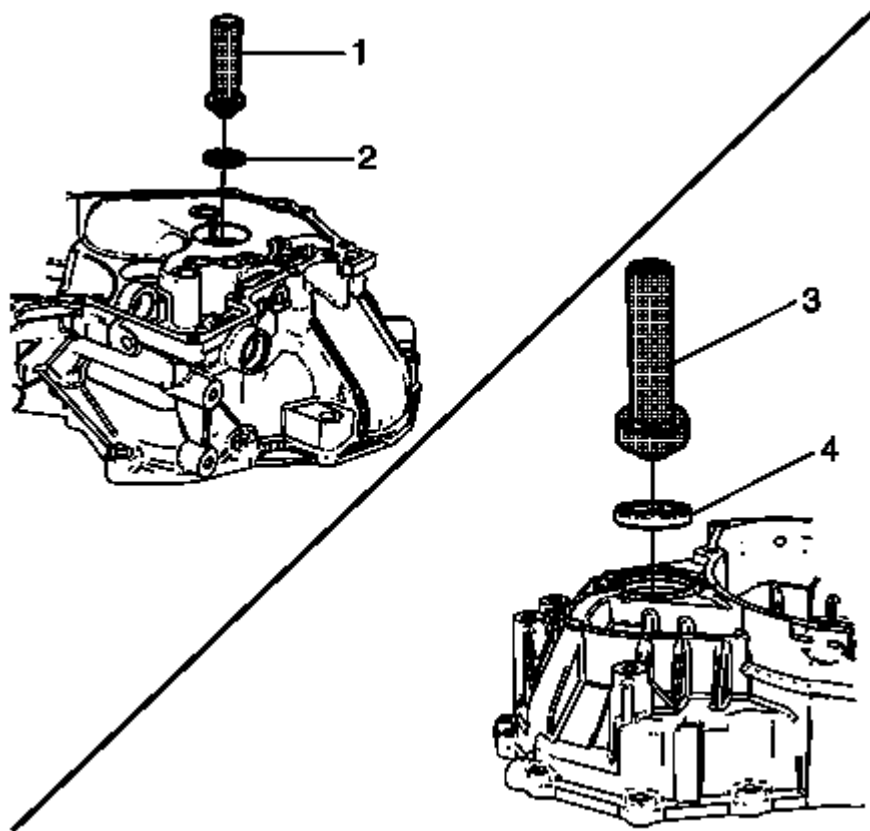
Input Shaft Oil Seal And Differential Right Side Oil Seal
